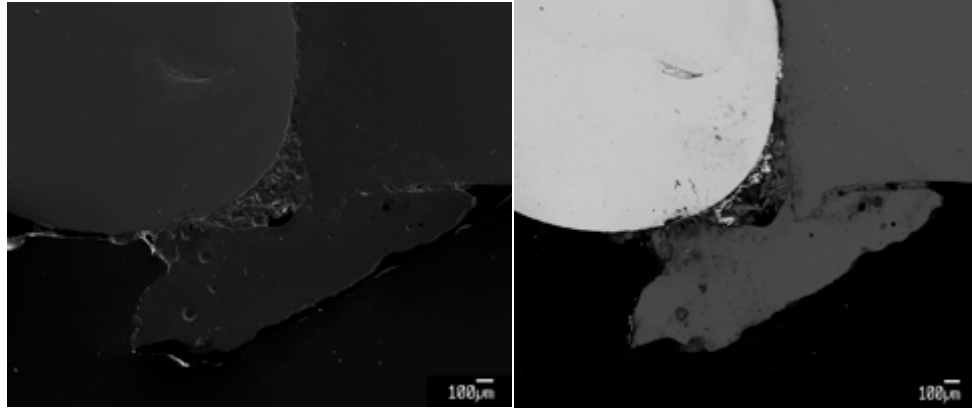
Damaged Al at the bottom, right: SEI view, left: comp view
